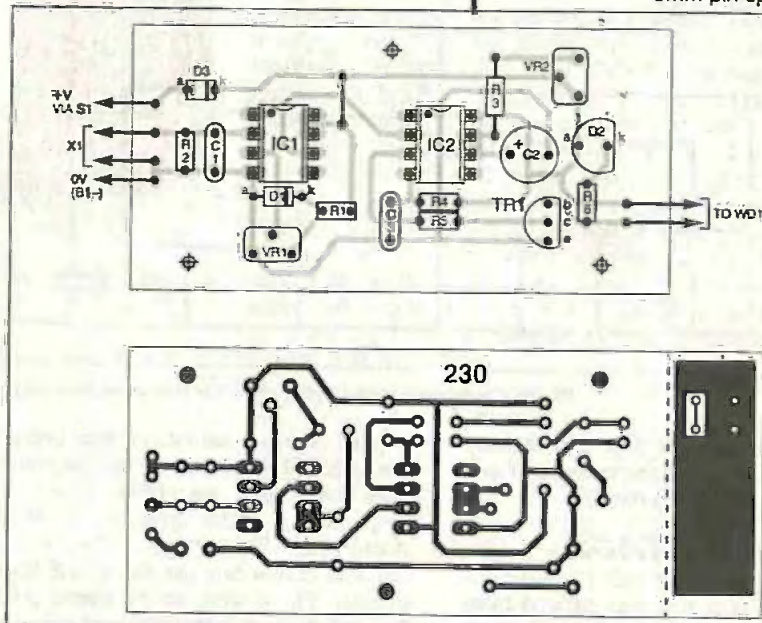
Vibralarm printed circuit board component layout, foil master and sensor board master.
